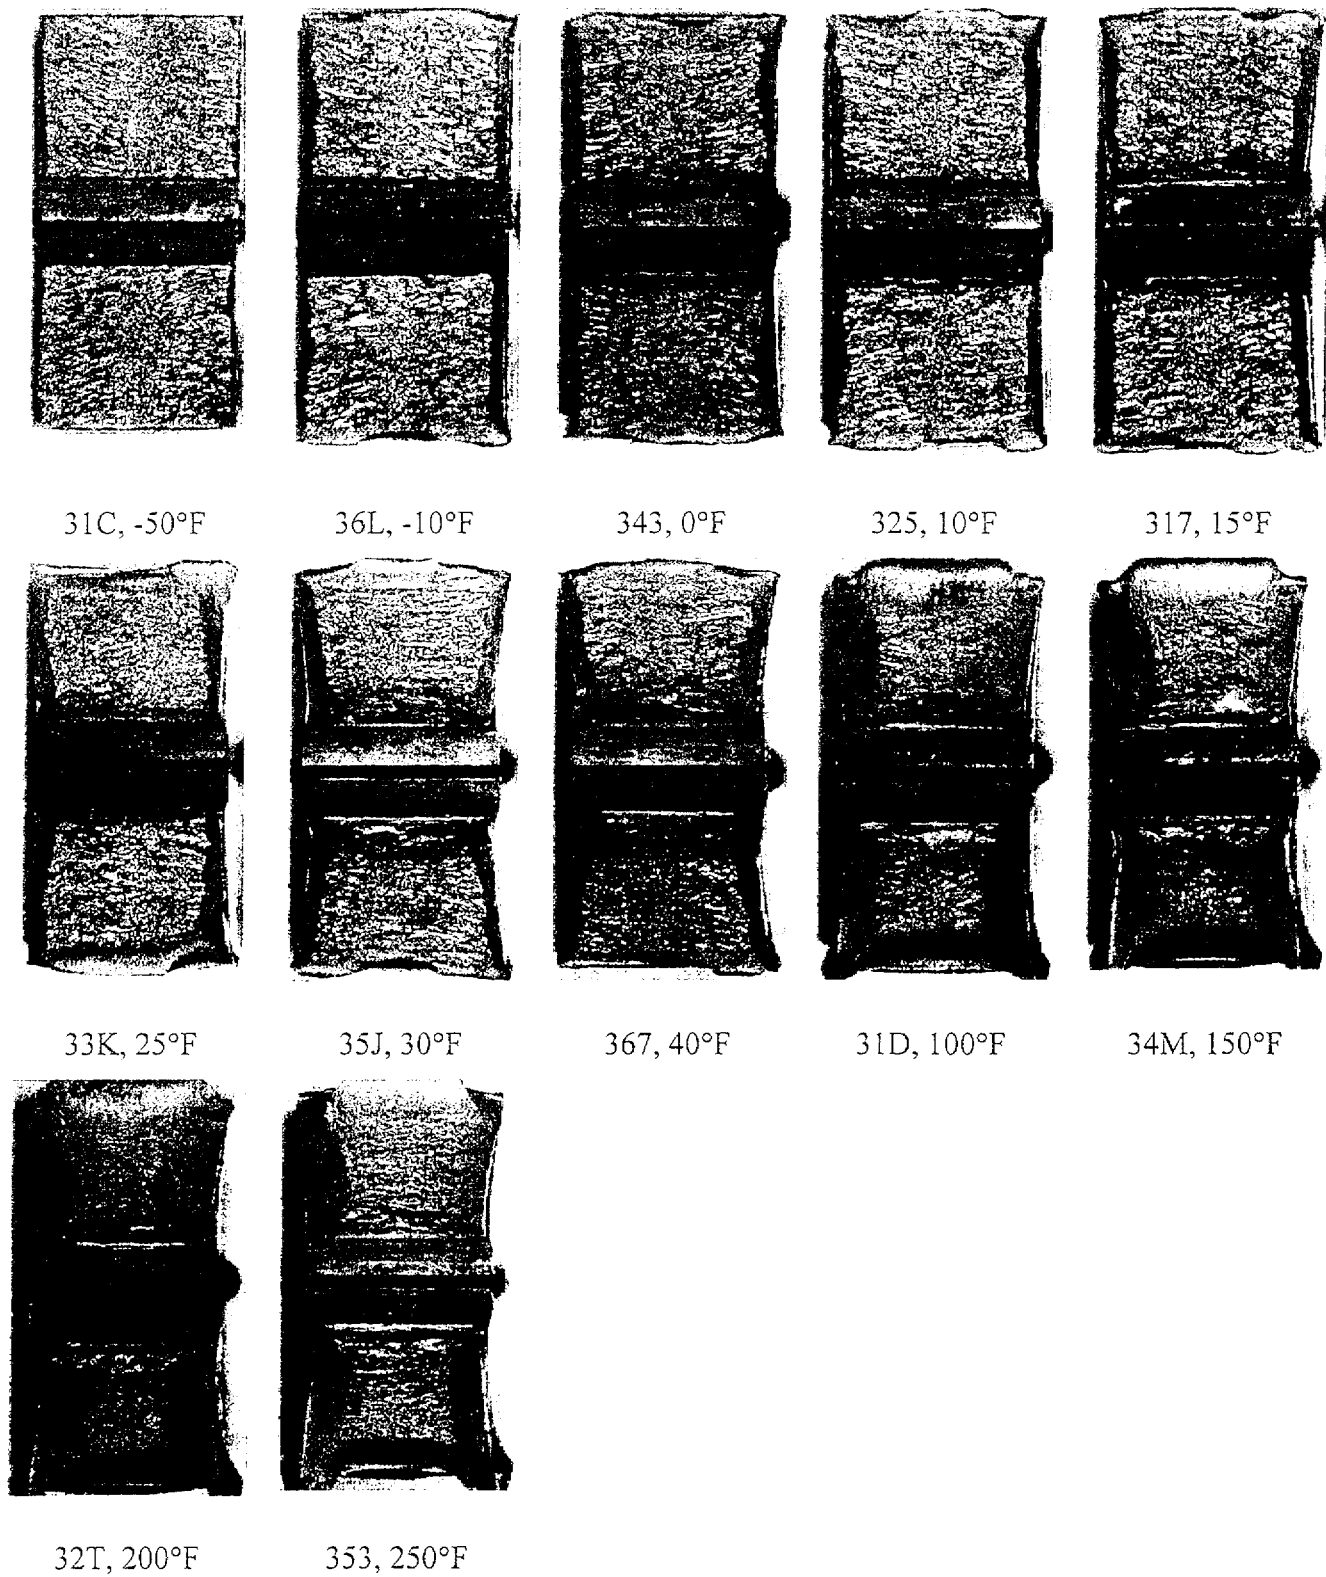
Charpy Impact Specimen Fracture Surfaces for St. Lucie Unit 2 Reactor Vessel Weld Metal Specimens
